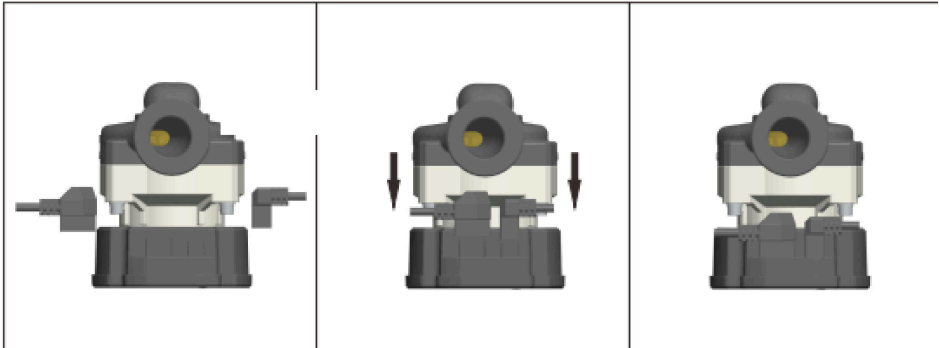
The power connector is on the left, the PWM signal connector on the right. Point the plug at the socket of the control box and push it in until it clicks
